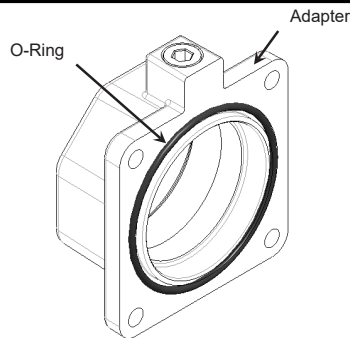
View of Adapter and O-ring Assembly Showing Proper Installation of Gasket
